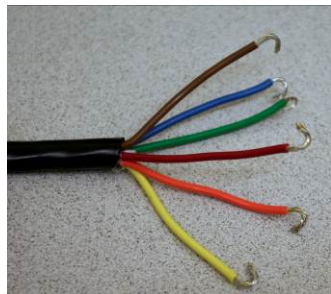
G-5500 AZ/EL Cable – Curved and Soldered
